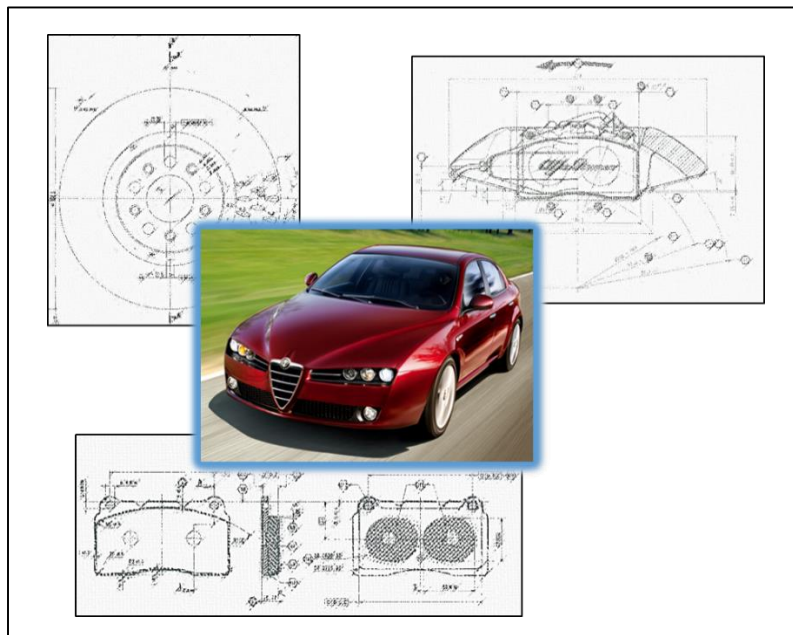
Alfa Romeo 159 (center) and general scheme of brake system components, brake disc (top left), caliper (top right) and brake pad (bottom).
